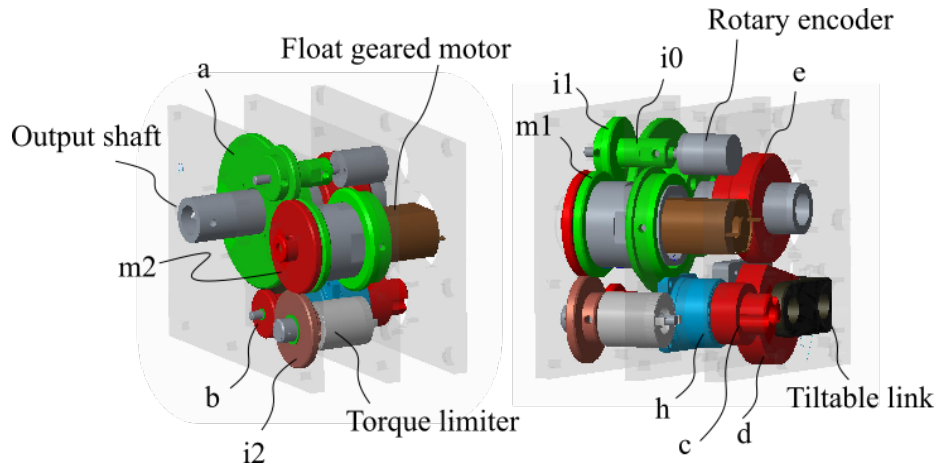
Component arrangements of the joint prototype in 3D CAD model.
